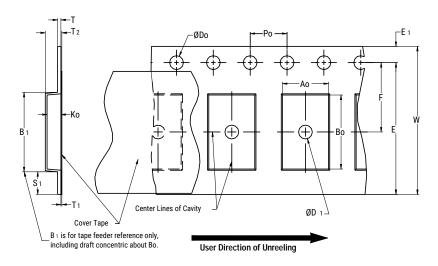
Punched (Paper) Carrier Tape Dimensions
